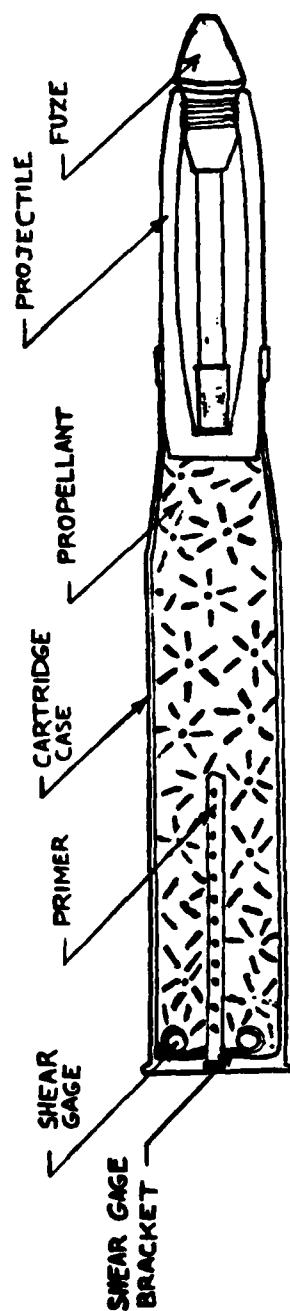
SHEAR GAGE INSIDE A CARTRIDGE
